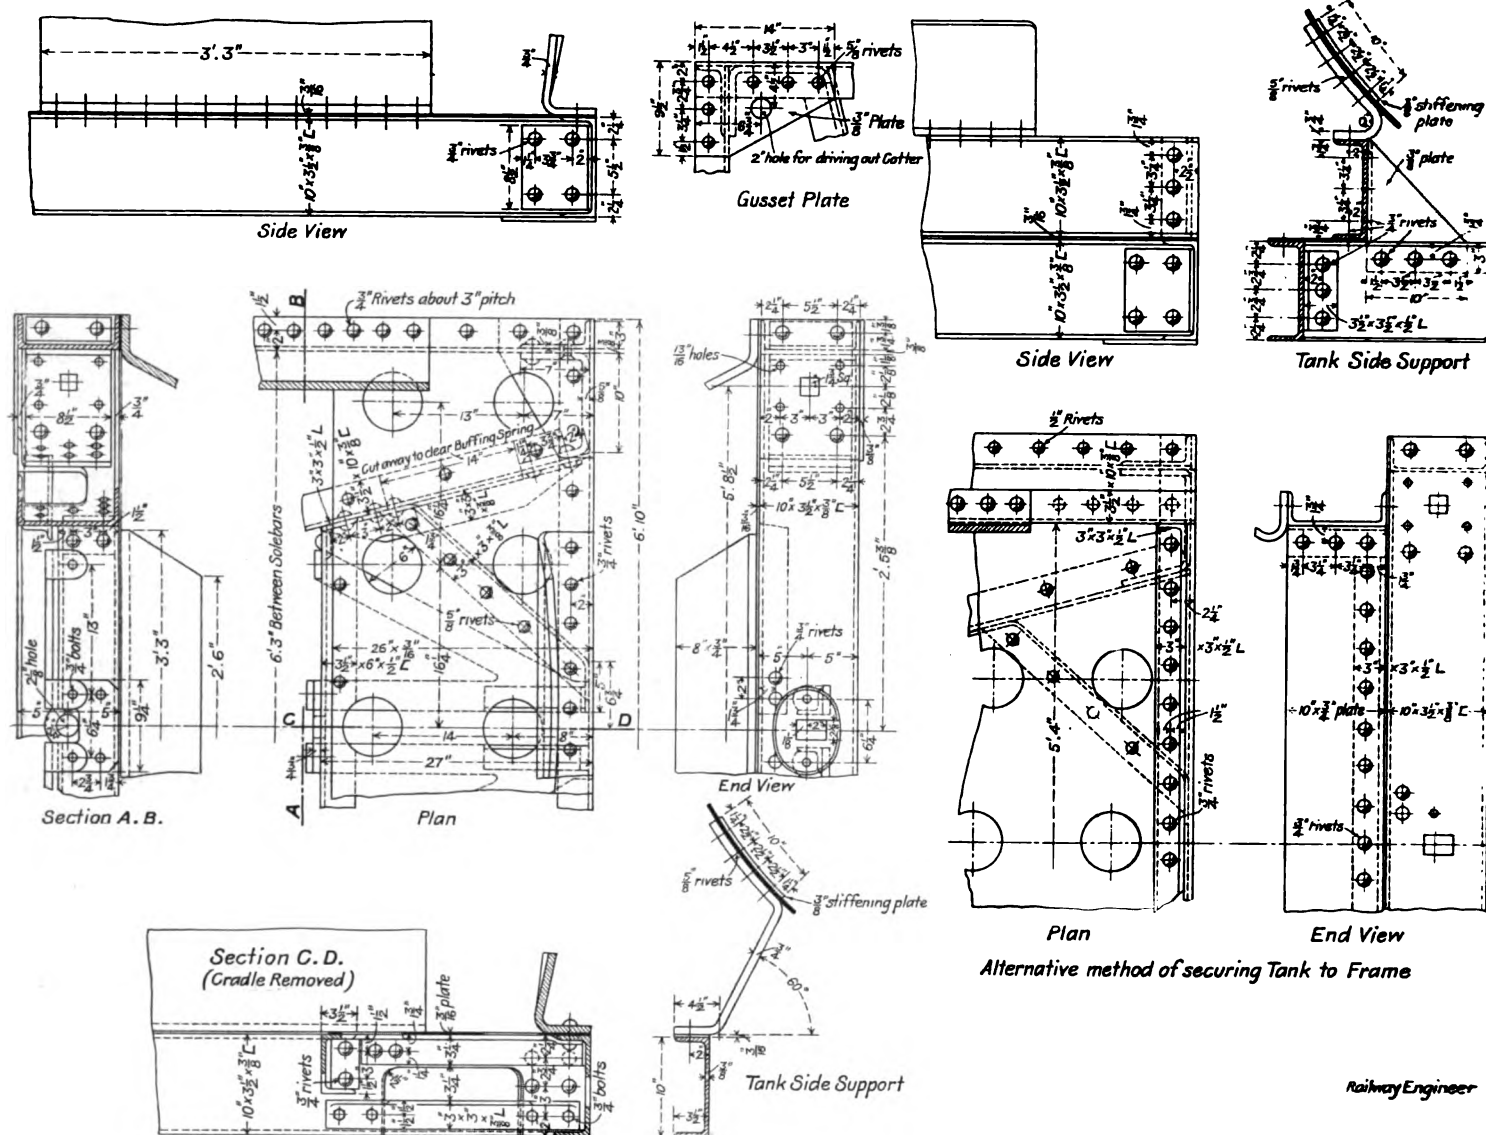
Frame Details. 20-Ton Private Owners' Tank Wagon.
